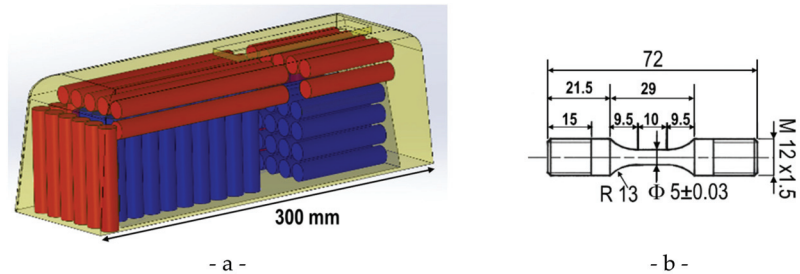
(a) Type 100 ingot with indication of wire cutting positions (skin in red, core in blue) for cylindrical bars. (b) Tensile and fatigue sample geometry.
